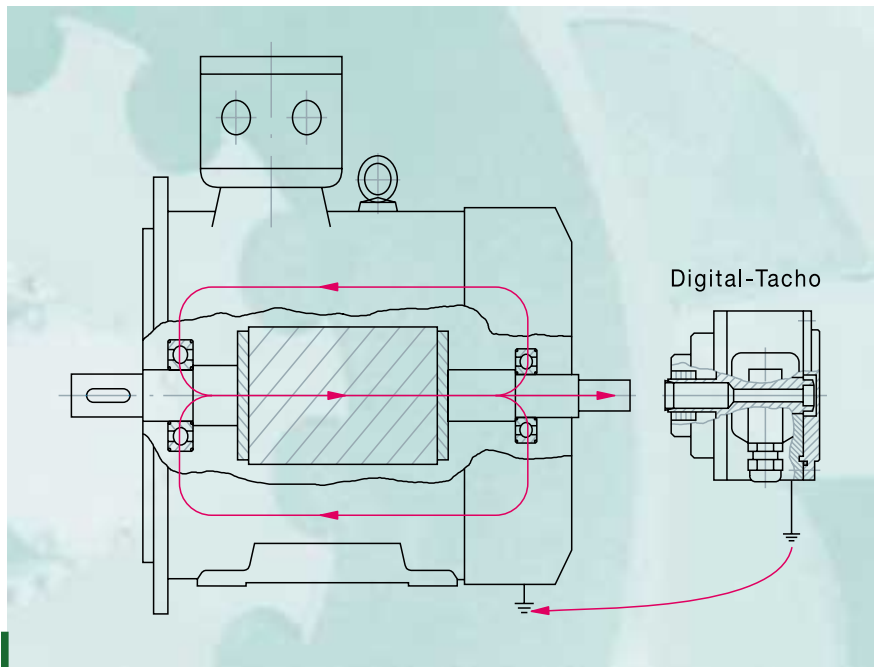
Voltage differences between each end of the rotor create shaft currents which if the rear ball-bearing is insulated, endanger the built-on components.
